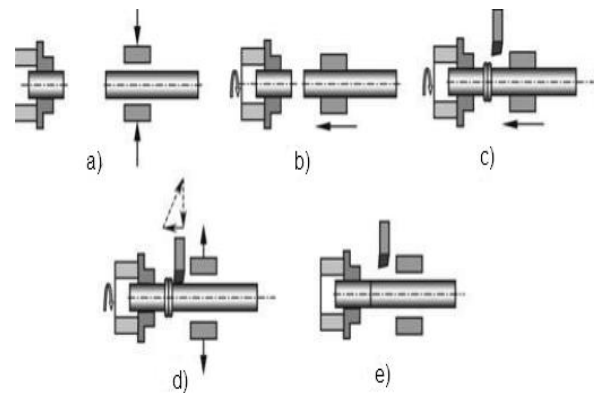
Stages of friction welding process (a, b, c, d, e)
